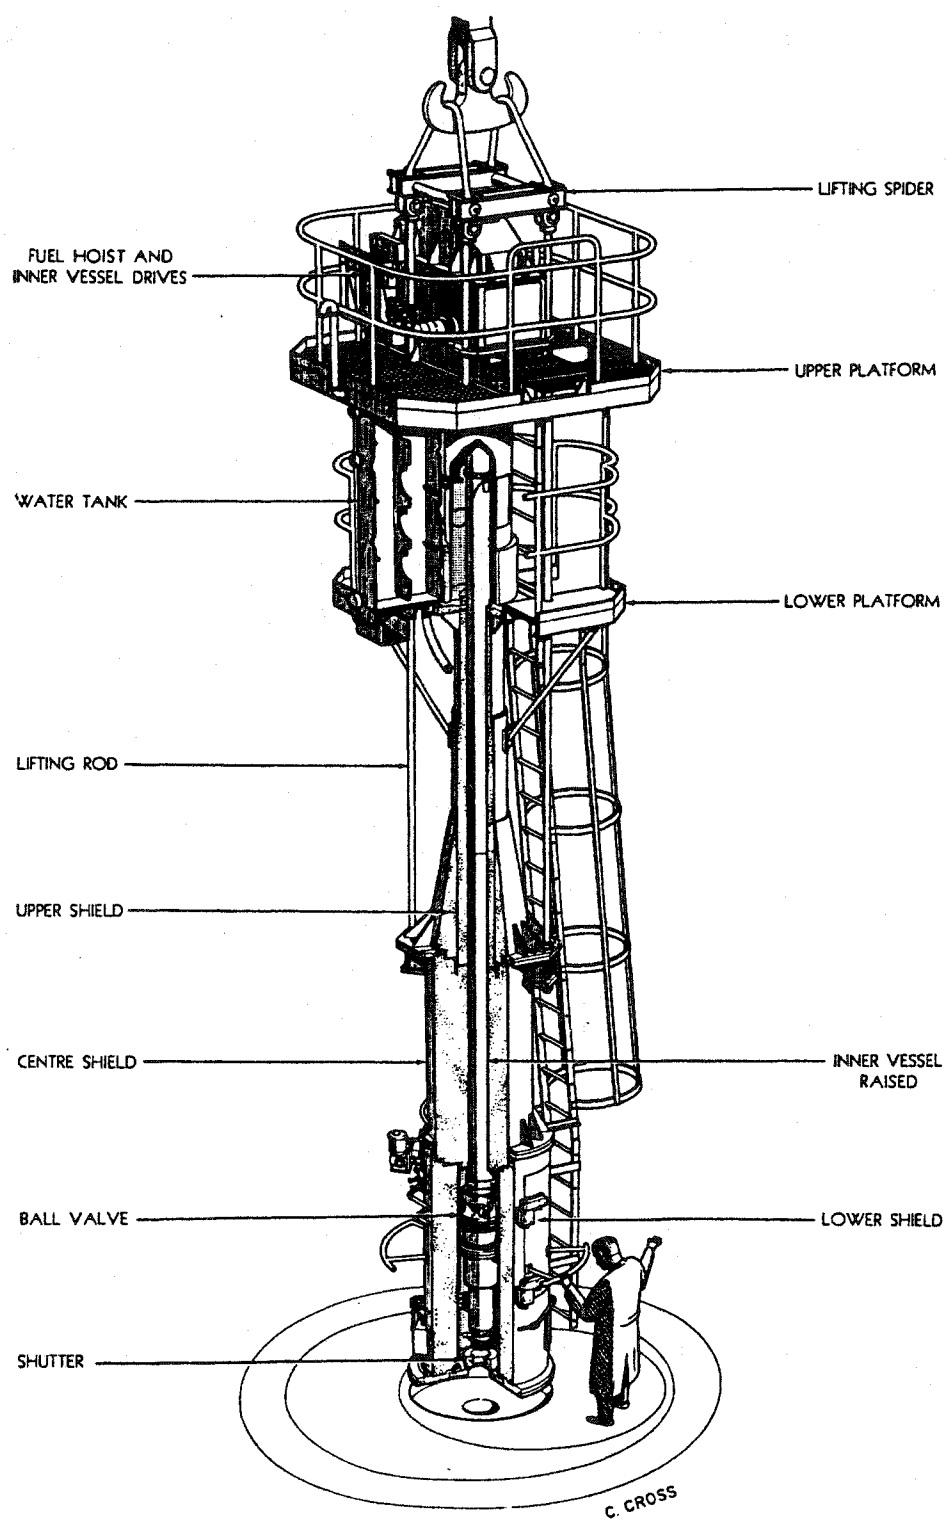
WR-1 Fuel Transfer Flask Cutaway
